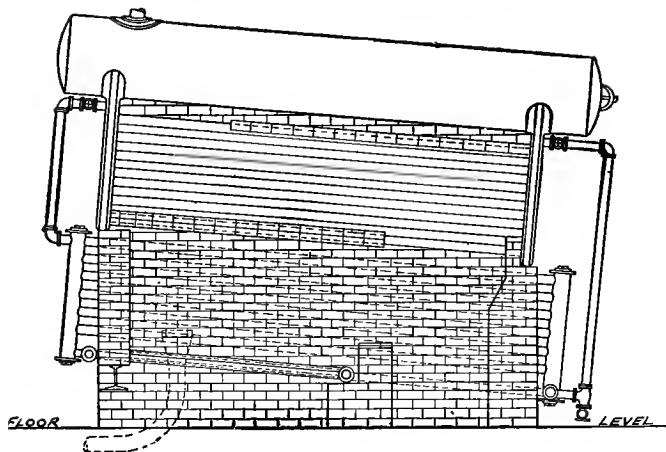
Plant Using Coarsely Ground Coal under Steam Boiler.
